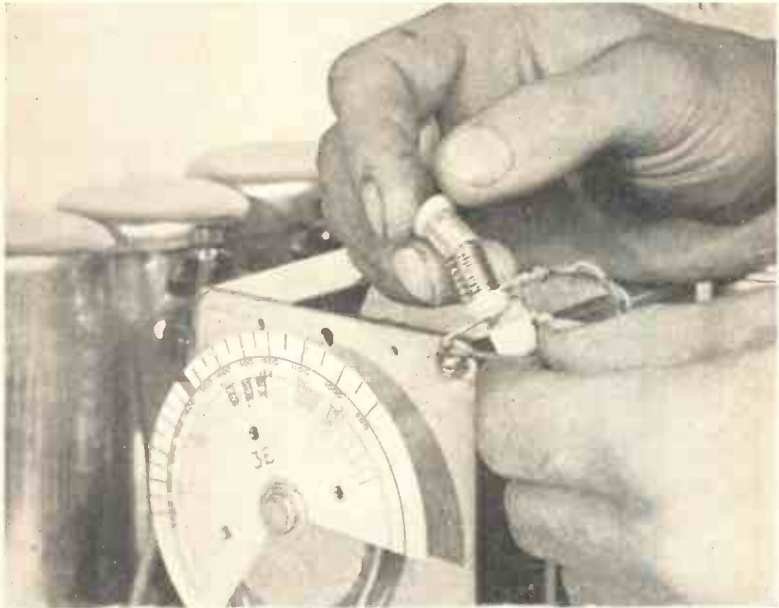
A NEW PILOT BULB IS FITTED BY DETACHING THE LAMP HOLDER FROM ITS POSITION ON THE FRONT CONDENSER PLATE.
